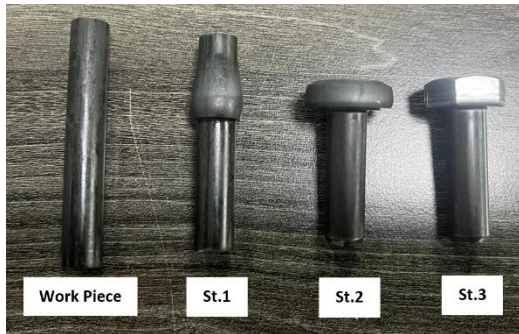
Station specimens of DIN 933 Hexagon Head Bolt, M12*1.75*35
